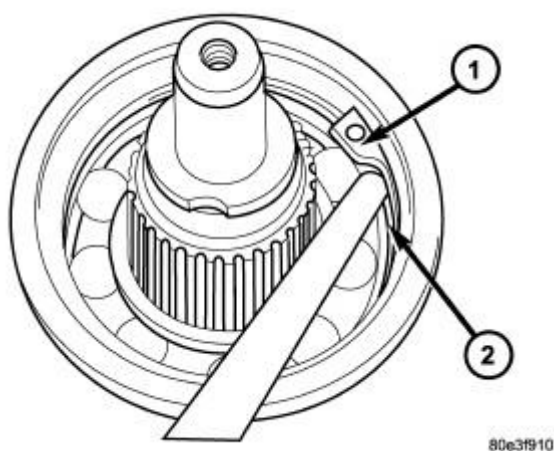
Remove/Install Rear Output Shaft Retaining Ring
